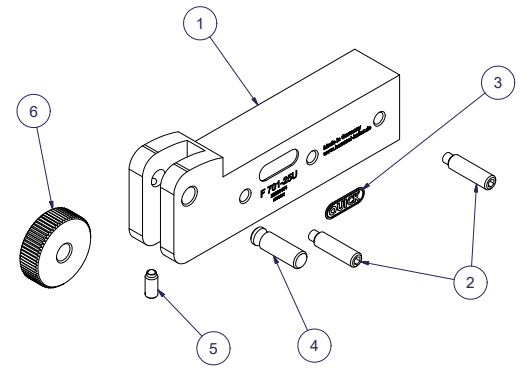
Series F701 exploded drawing (CNC-Lathe)
